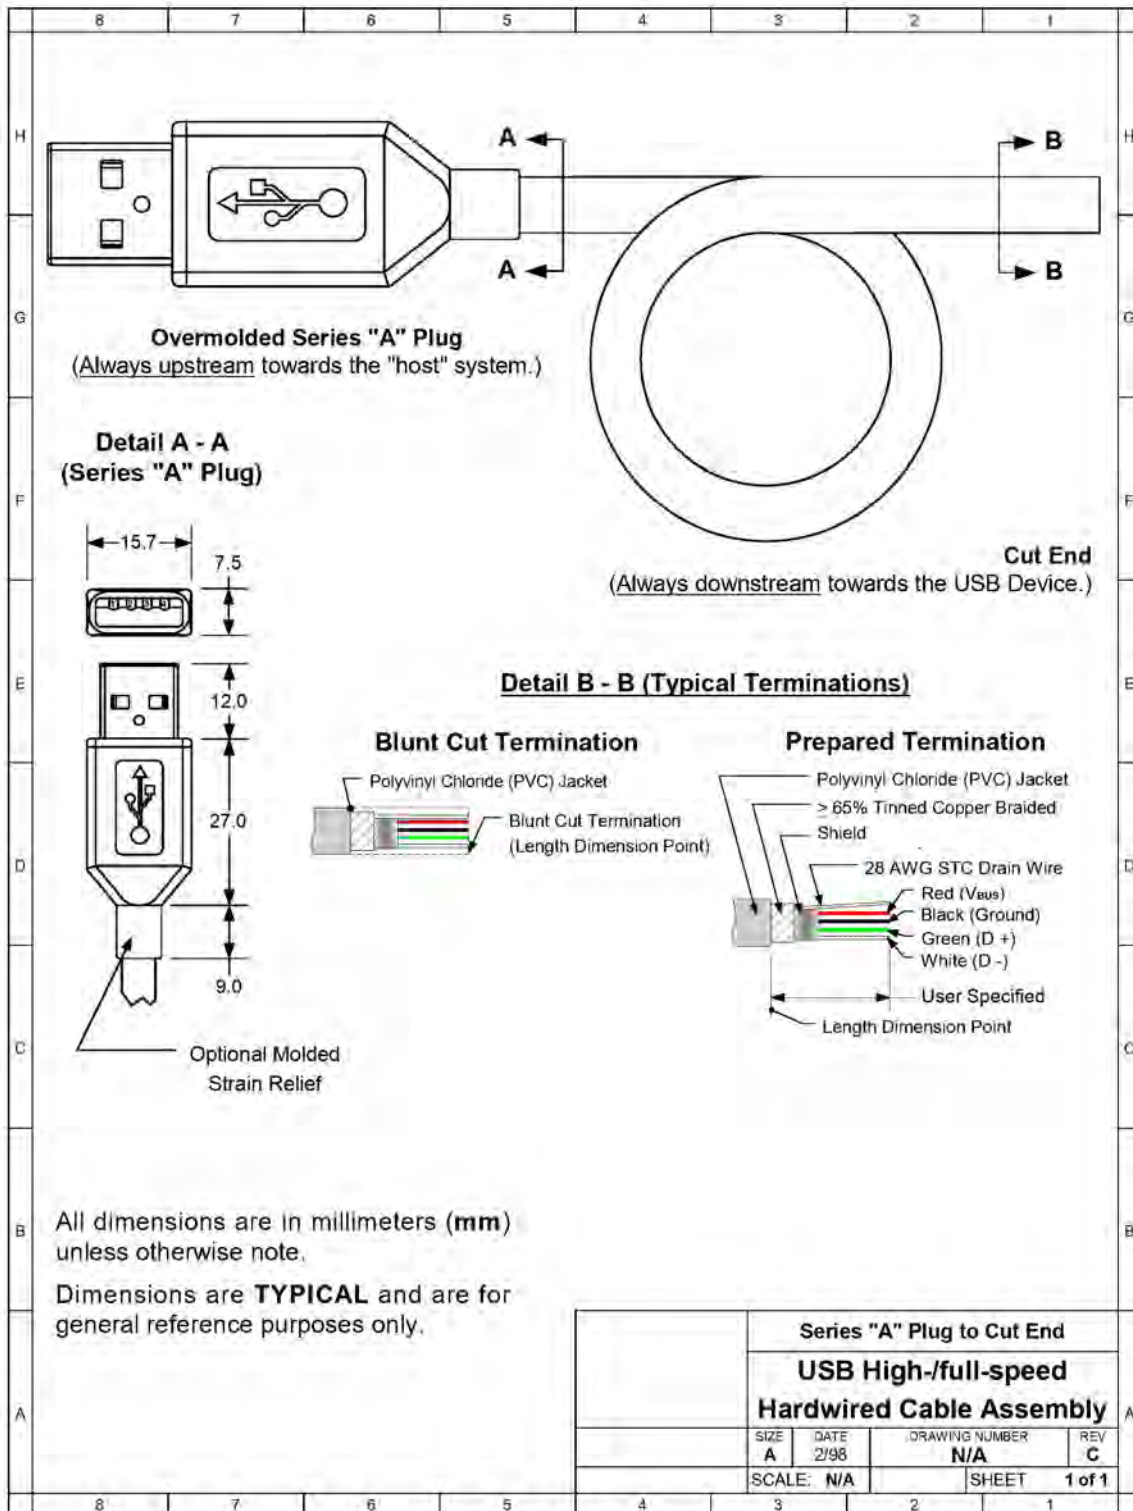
USB High-/full-speed Hardwired Cable Assembly
